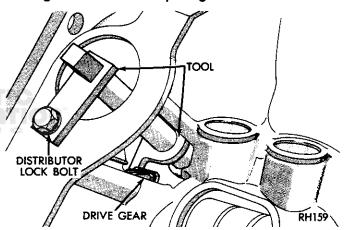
Camshaft Holding Tool C-3509 in Installed Position
